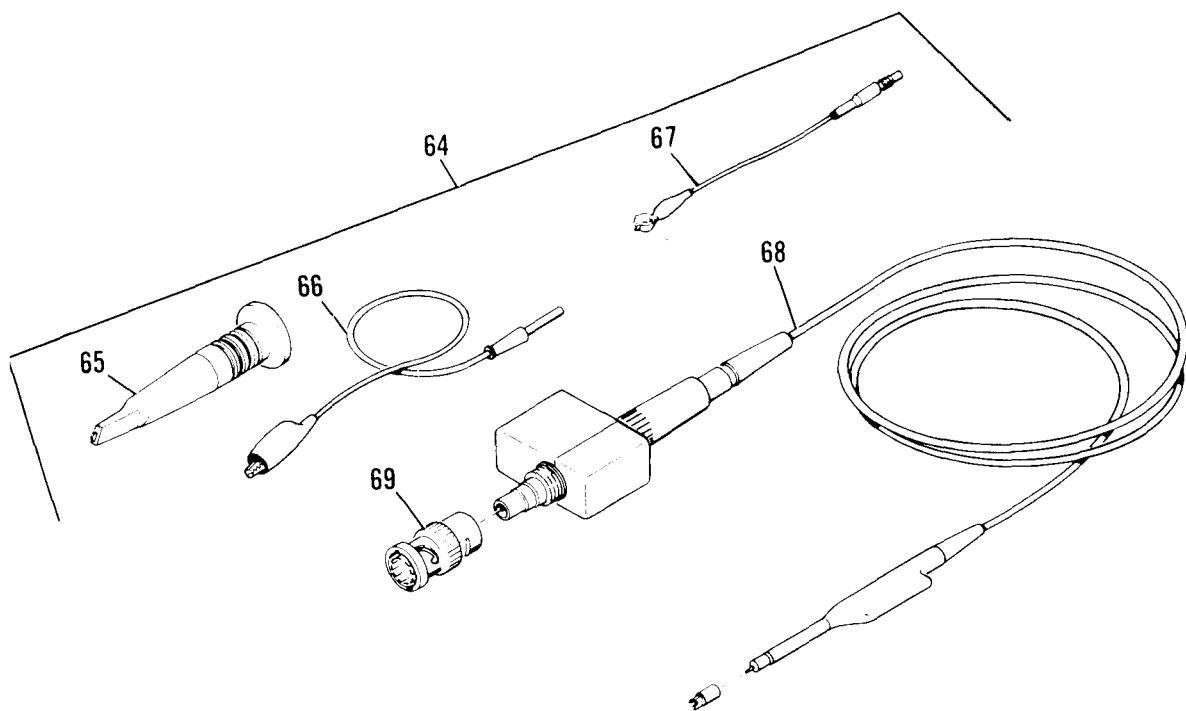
Oscilloscope AN/USM-488 Exploded View (Sheet 3 of 4)
